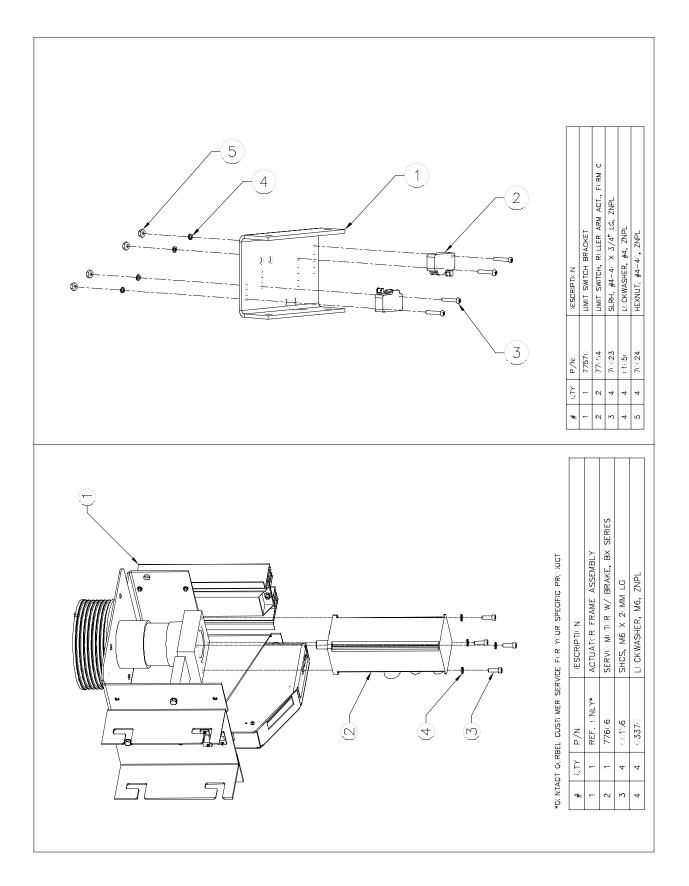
Motor and Upper/Lower Limit Switch Assembly.
